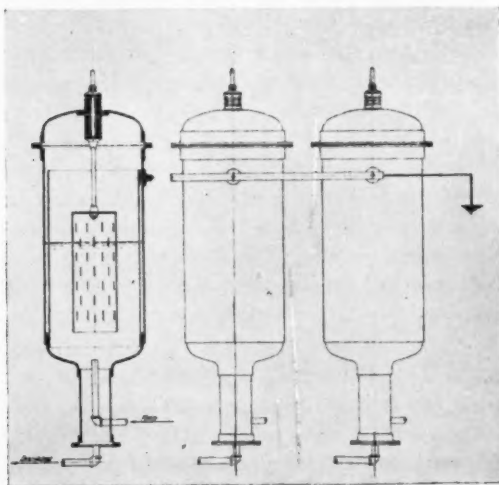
Sketch showing Mechanical Details of typical 3-Phase Electric Electric Boiler.
